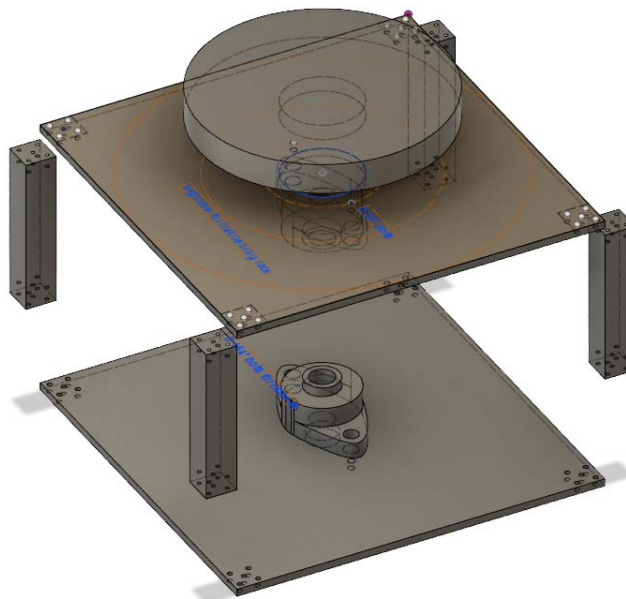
Fusion 360 CAD drawing of the azimuth motor section in progress
